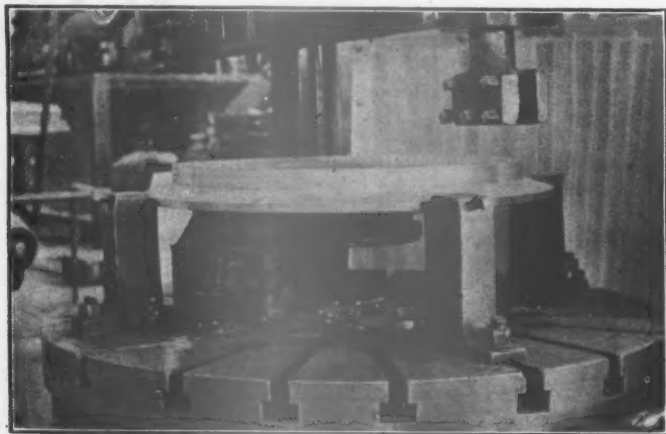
Extension Jaws Hold Back Cylinder Head for Machining
